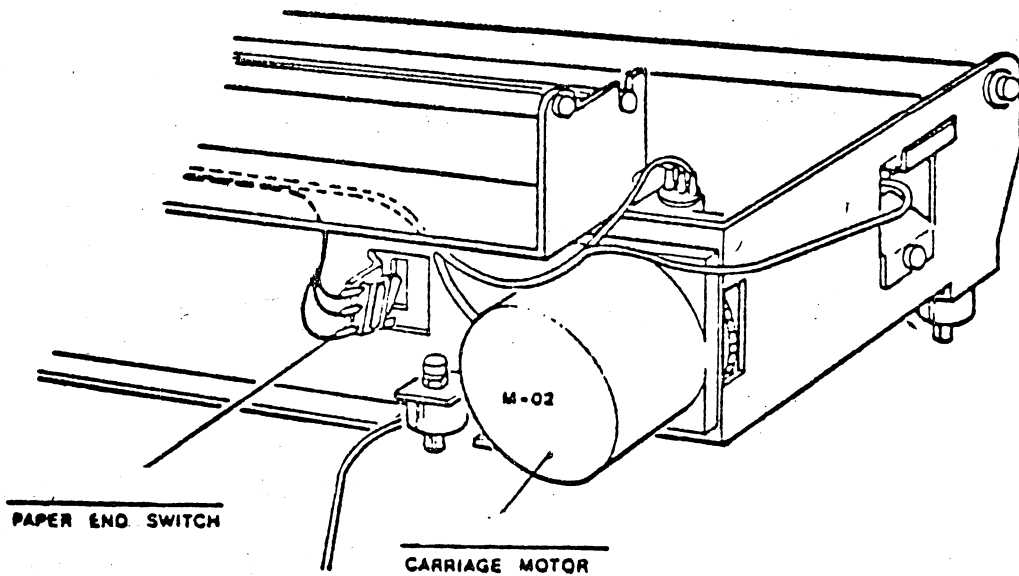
Mara Mechanism Carriage Motor Assembly
